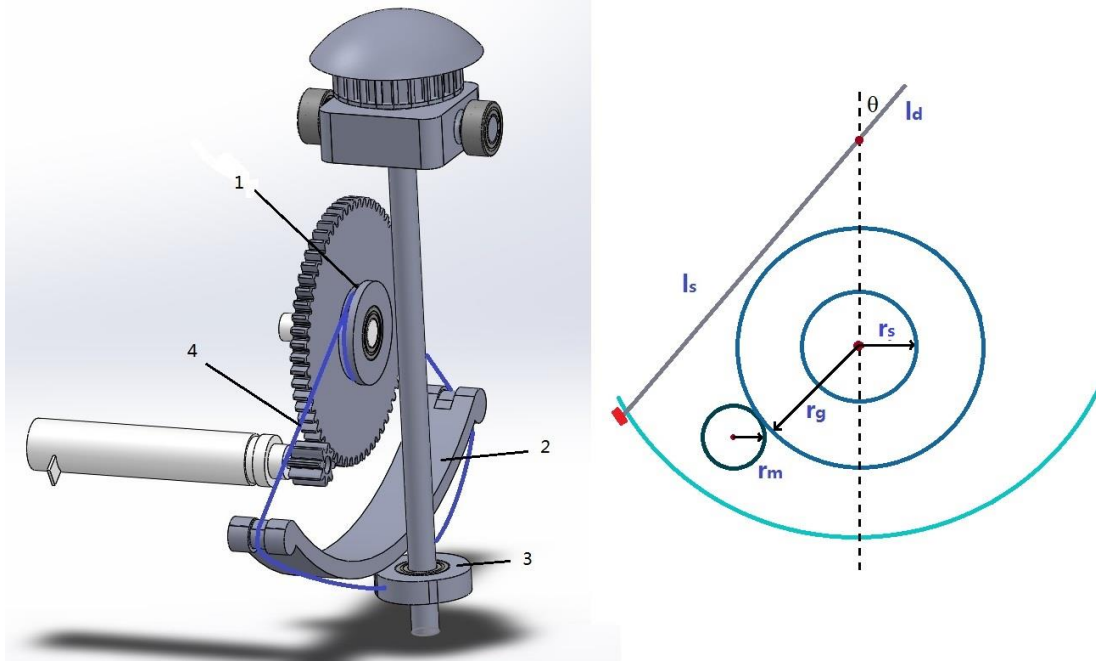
Left: Configuration of the gear–spool–cable mechanism. 1. Circular groove, 2. arc guide rail, 3. shaft carriage, 4. nonstretchable cable. Right: Diagram of the gear–spool–cable mechanism. r_m is the radius of the minimal motor gear, r_s is the radius of the spool on the bigger gear, r_g is the radius of the bigger gear, l_d is the short length of the disc shaft from the pivot centre to the surface of the hemispherical disc, l_s is the length of the disc shaft from the pivot centre to the point where the nonstretchable cable and the shaft intersect, and θ is the pivot angle.
